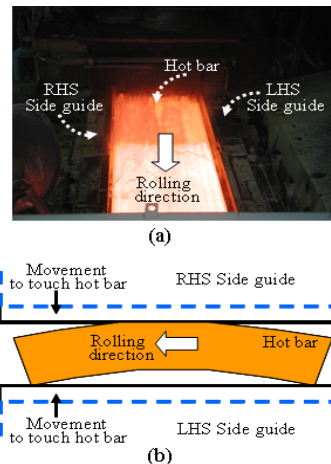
Contact shapes between hot bar and side guides when they are shown in (a)complete view and (b) top view
